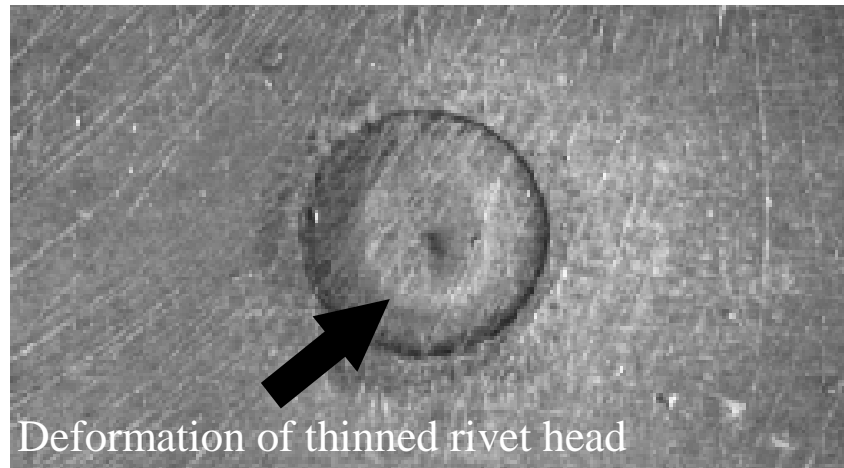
Close-Up of Grinding Damage to Rivet Head, Middle Row Rivet, Joint Shown in Figure 27-12.
